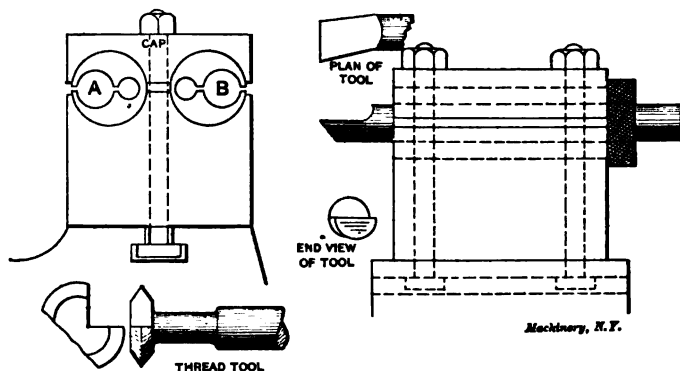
Boring Tool Holder and Type of Inside Threading Tool.
